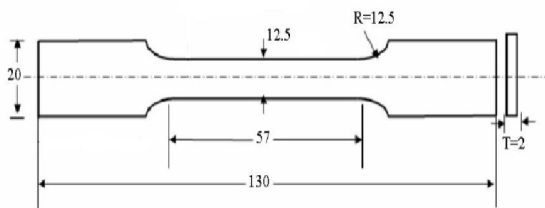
Dimensions of the tensile test sample (dimensions in millimeters)
